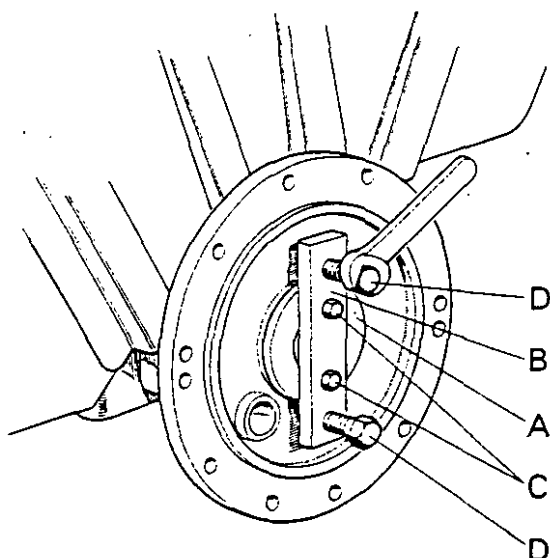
REMOVING OIL SEAL HOUSING FROM AXLE CASE
